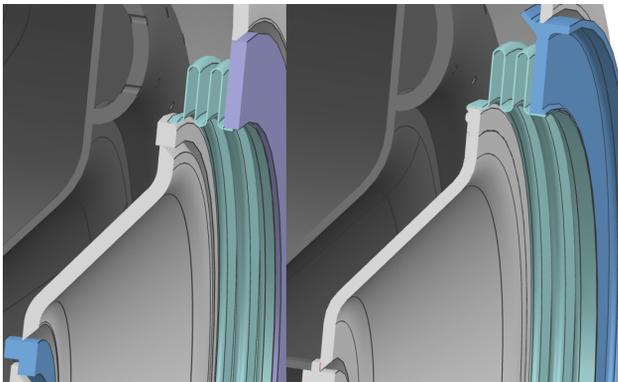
SSR1 Slip Joint, Prototype Design (left), Production Design (right).
